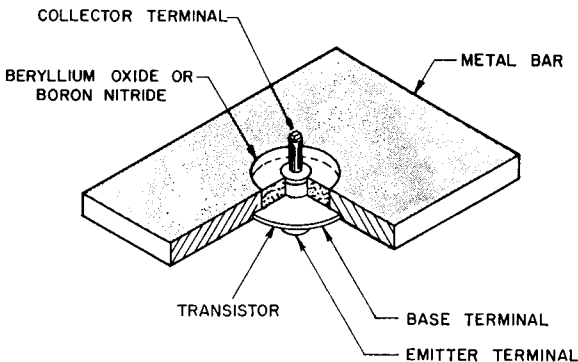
Mounting arrangement for a coaxial-package transistor in a microstripline circuit.
